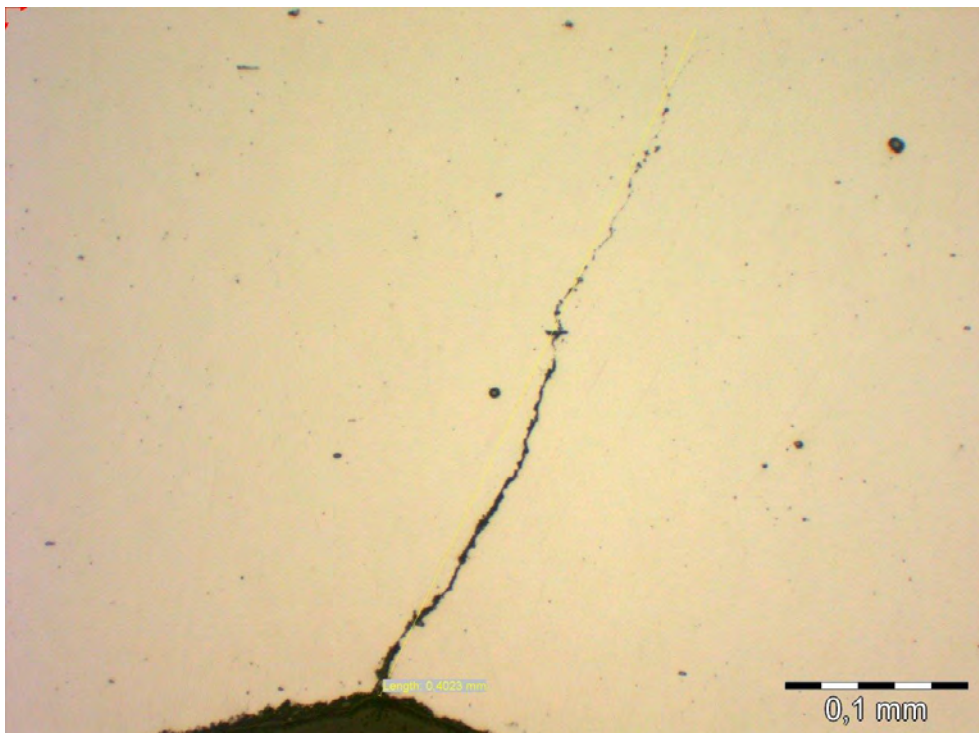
Cut six in crack at segment C, second ridge on barrel no. 14389
